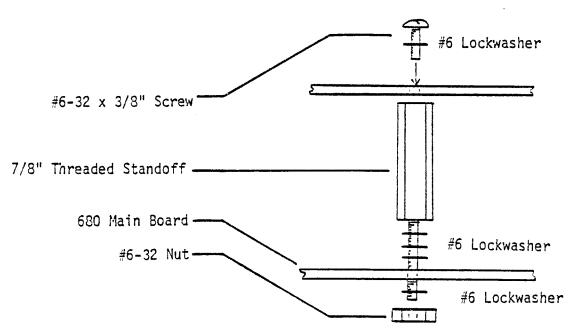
B. Installation of Threaded Standoffs onto 680b Main Board
